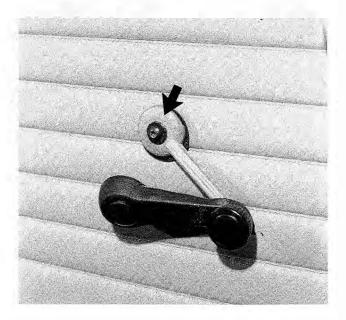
Window crank and mounting screw (arrow). Trim and crank may differ slightly on other models.
